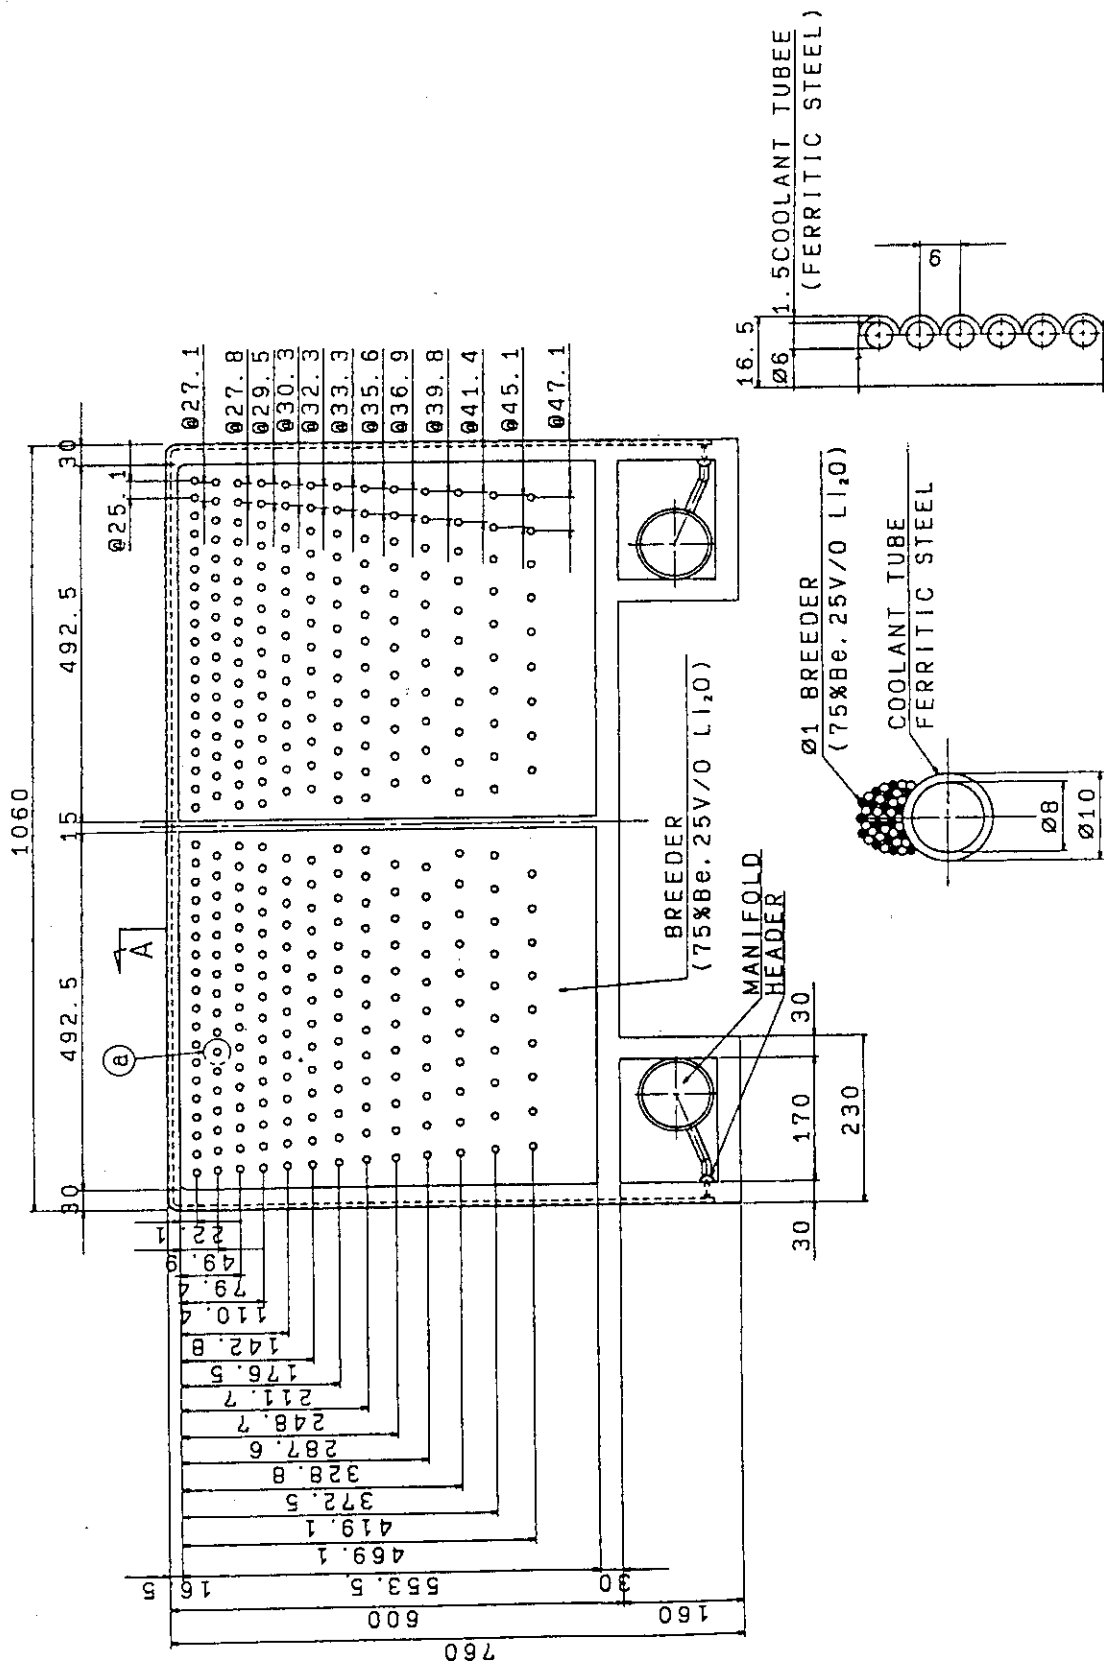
Cross-sectional view of helium-cooled test module for ITER testing (breeder/multiplier mixture type)
